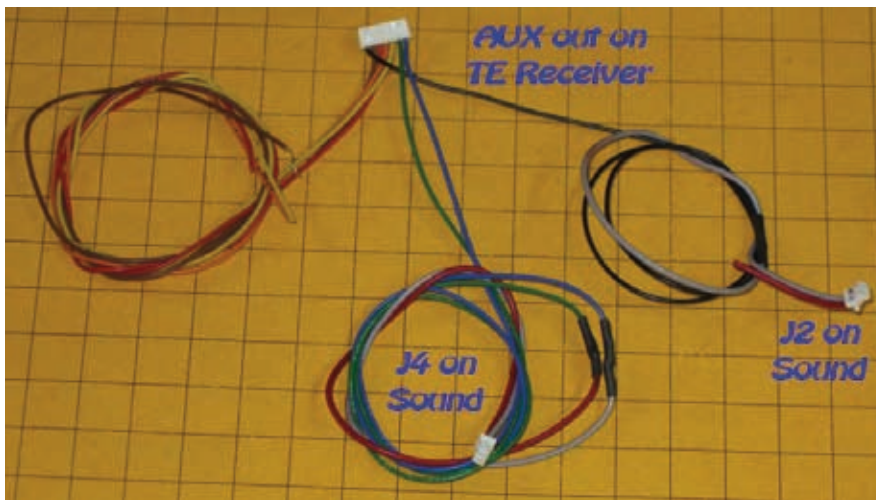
Insulate the connection with tape or heat shrink tubing)
